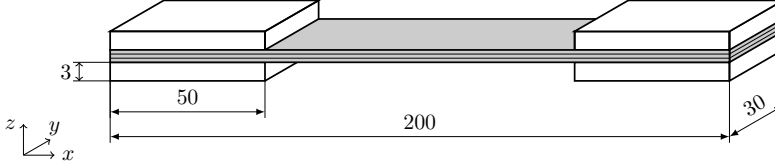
Dimensions of uniaxial tensile test coupon (in mm).
